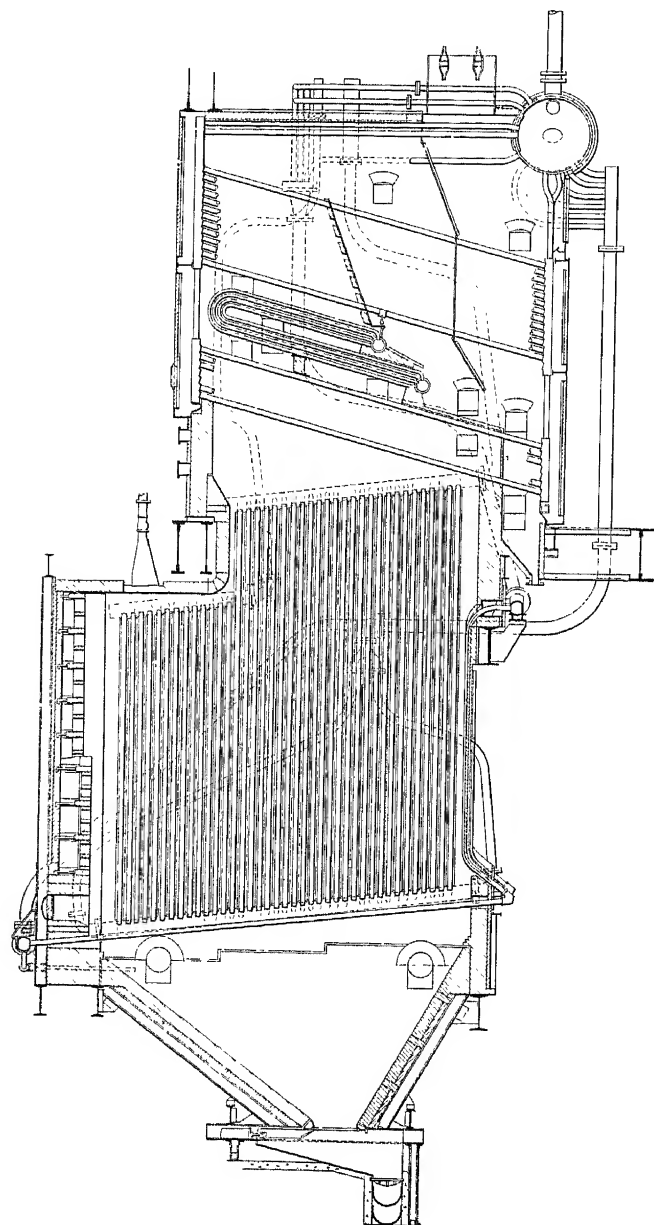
CROSS-SECTION OF BOILER AND FURNACE
